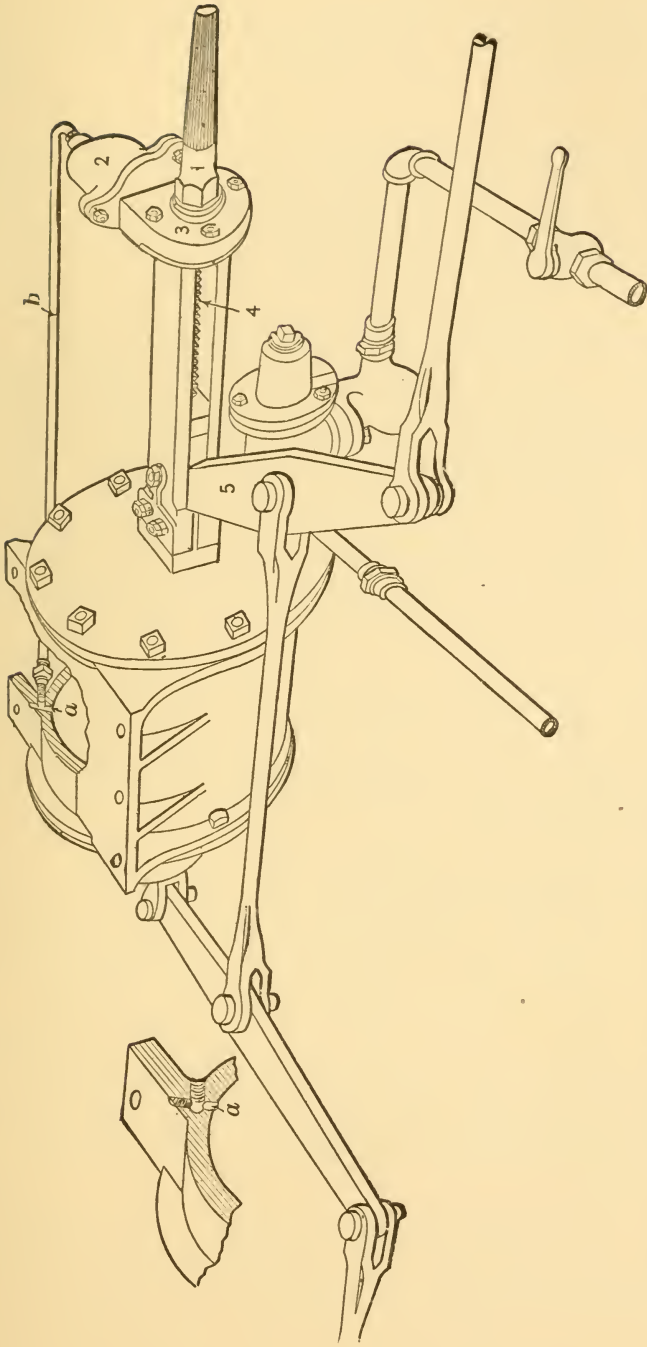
SHOWING APPLICATION OF AMERICAN BRAKE SLACK ADJUSTER TO A PASSENGER CAR EQUIPMENT.
